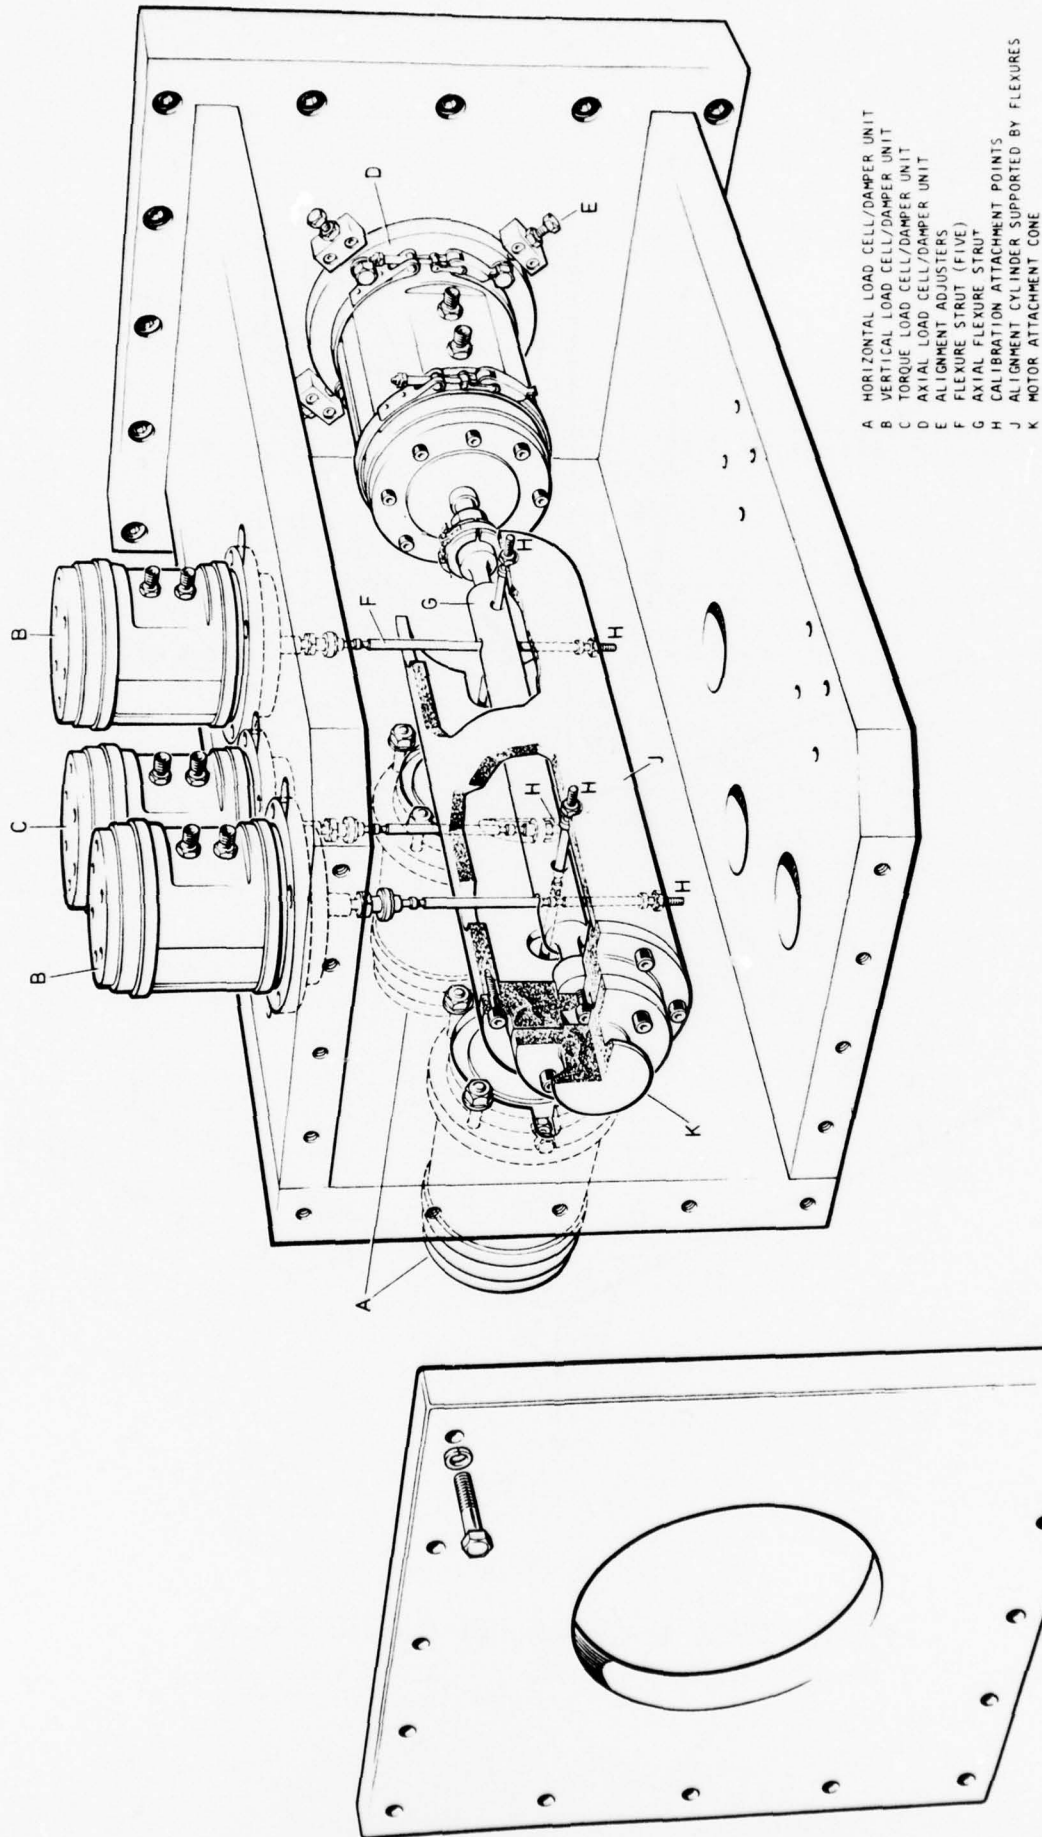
HORIZONTAL THRUST ALIGNMENT ASSEMBLY
